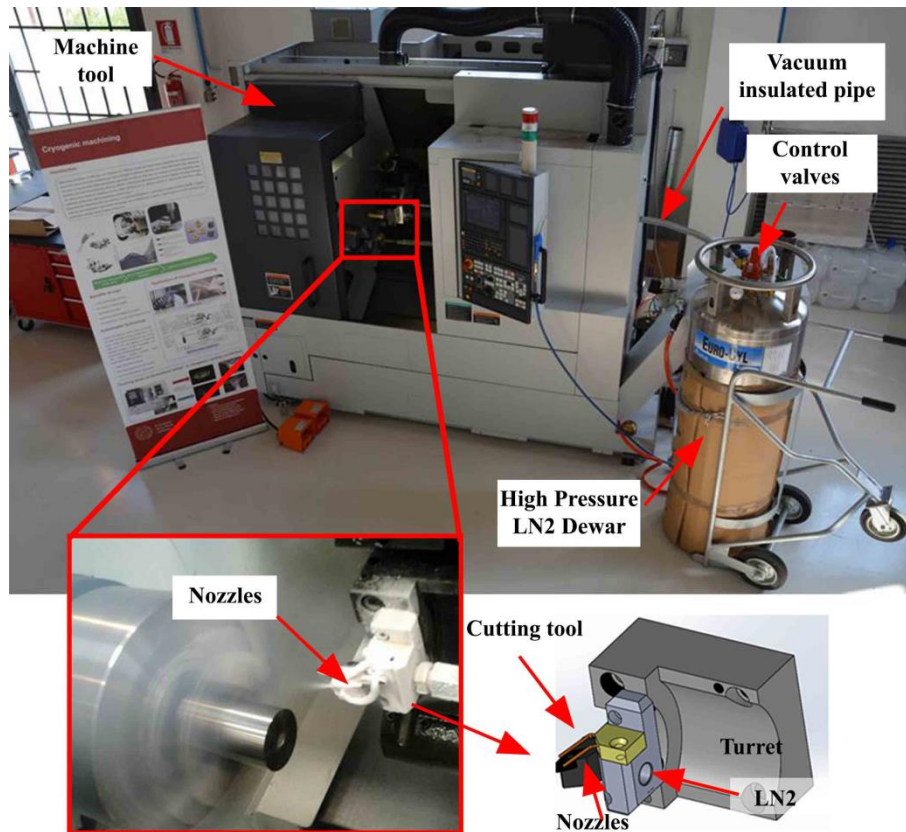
Overview of the developed cryogenic cooling apparatus implemented in the CNC lathe.
